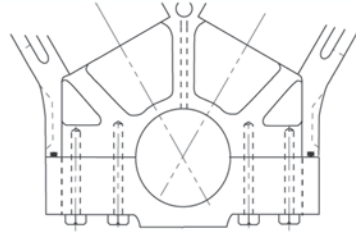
Ladder frame construction for the crankcase of an automotive engine
